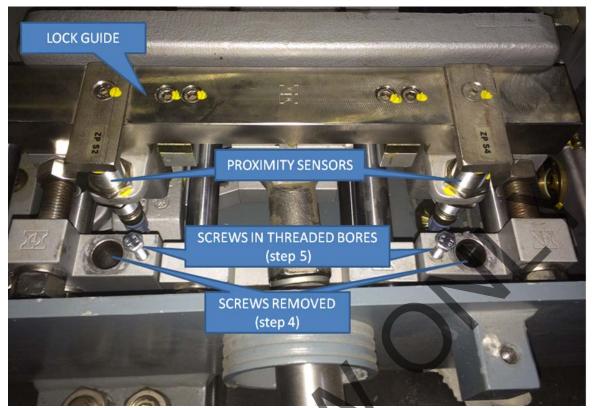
H&K Electro-Hydraulic Switch with Lock Rod, Proximity Sensor, Screws and Threaded Bores Highlighted
